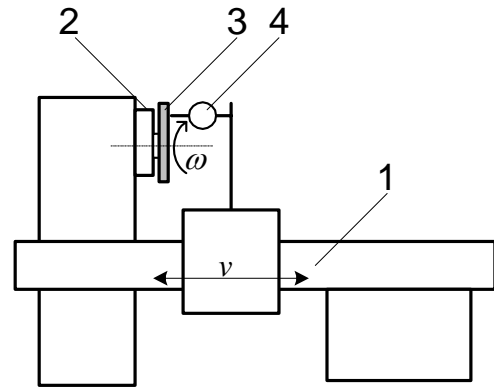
Idea of control runs – out flank for brake disc: 1-turning lathe, 2 – lathe chuck, 3 – brake disk, 4 – position sensor
